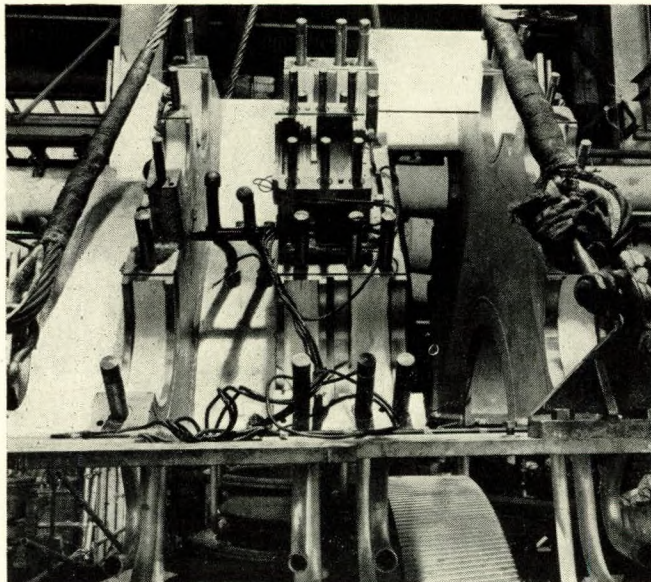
Y.E.A.D.1—Bearing housing and bridges
